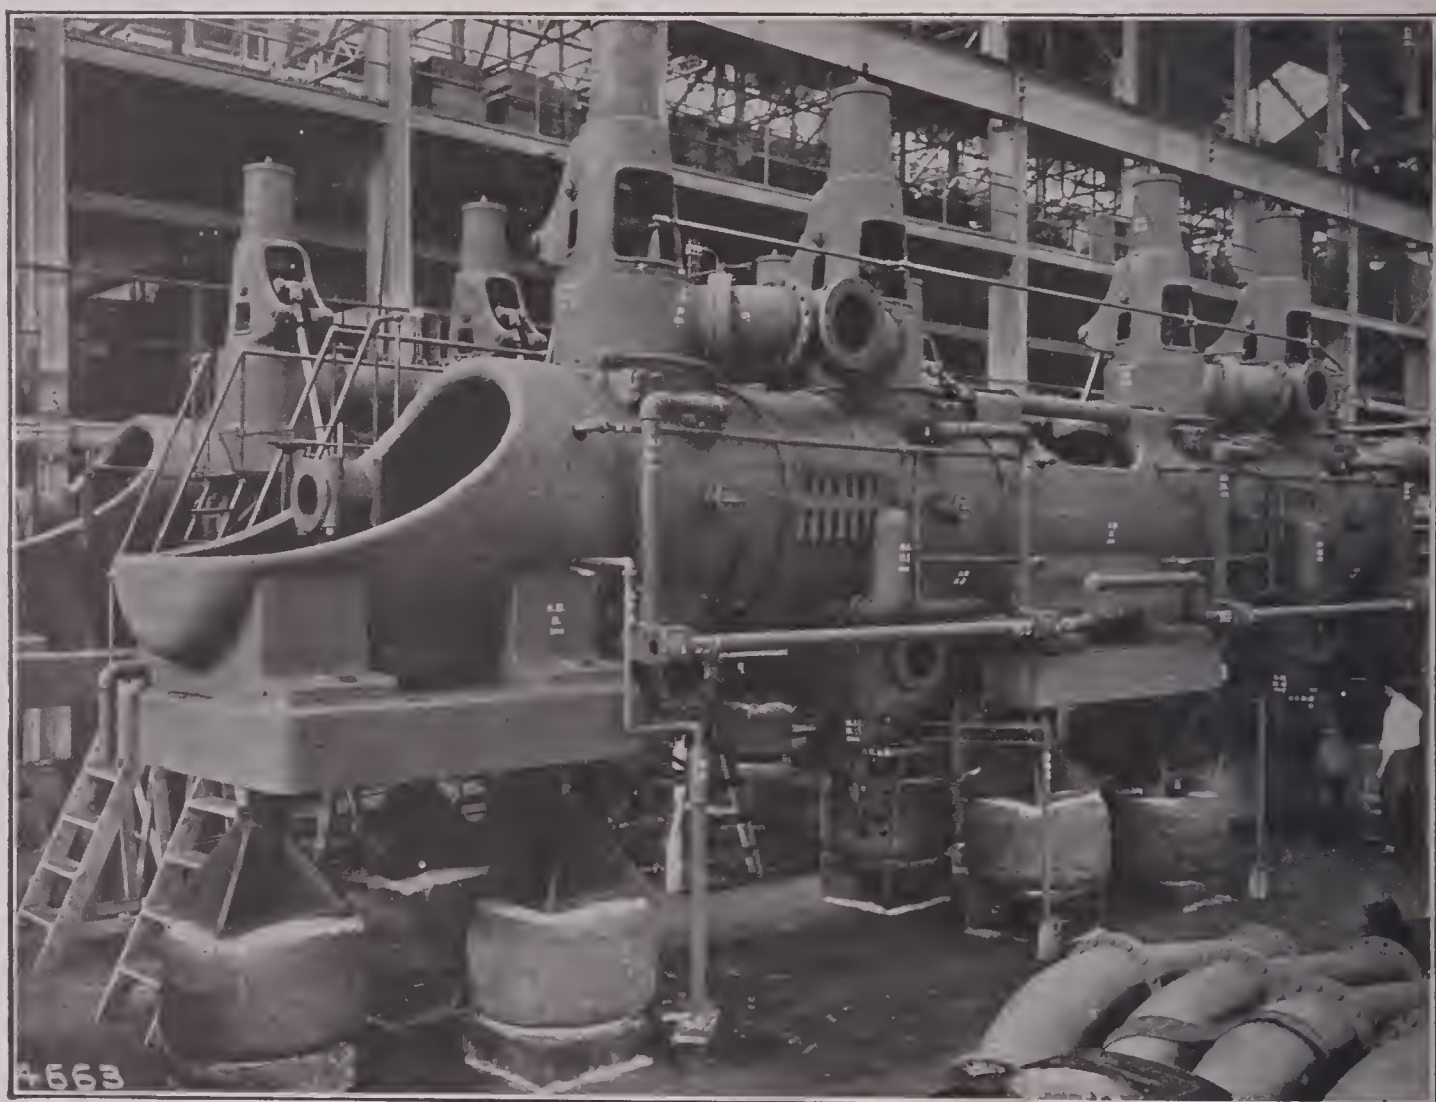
View showing Center and Rear Housing, Westinghouse Horizontal Engine.
